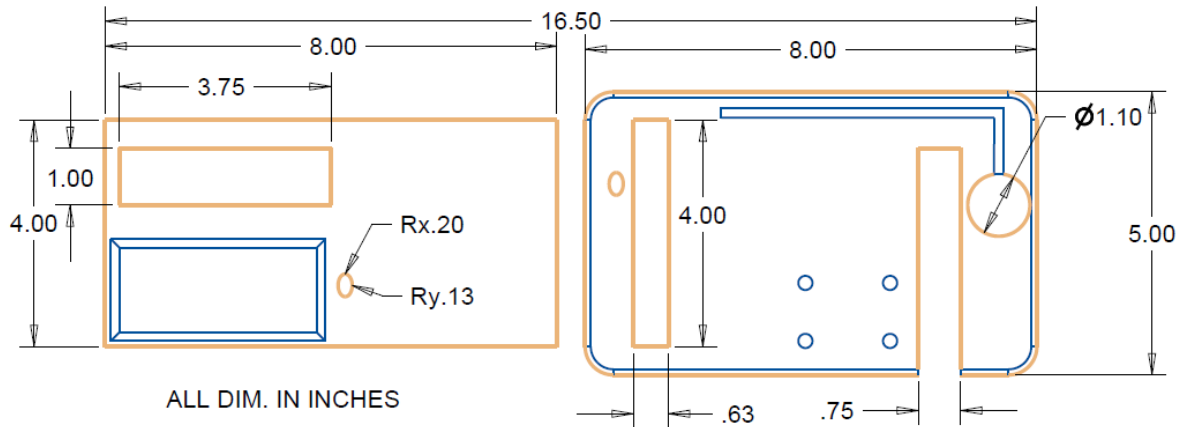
2D Creo Drawing for Waterjet Cutting
